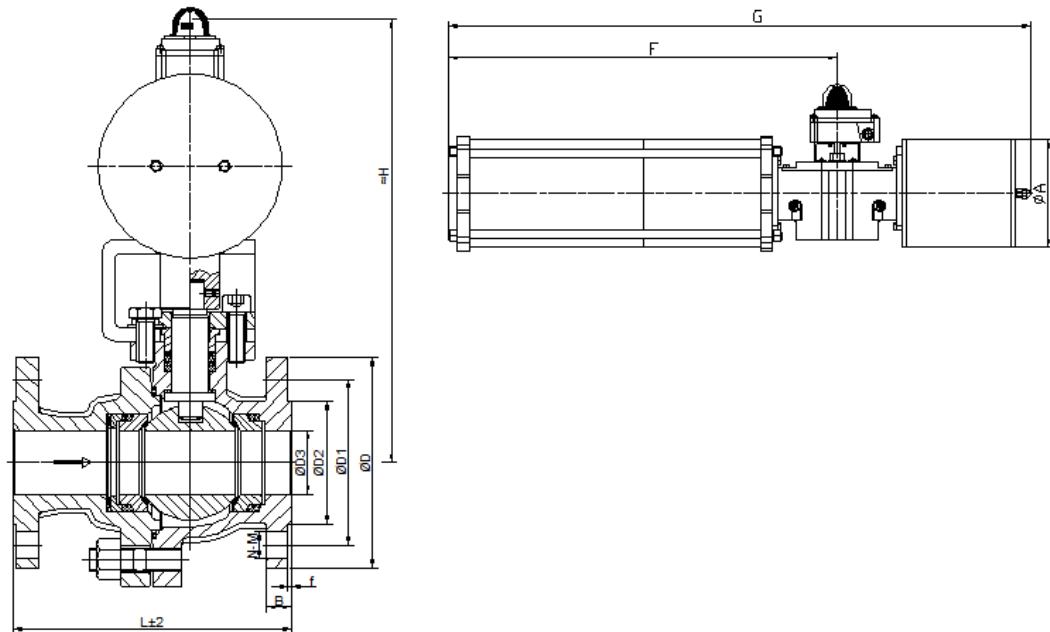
Dimensions of Linor floating ball valve with high temperature seat single-acting, PN16, flanged, sizes DN15-100
